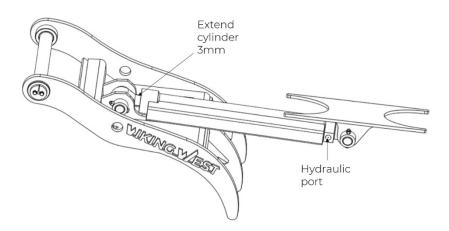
Unplug the hydraulic ports to extend the cylinder slightly.
